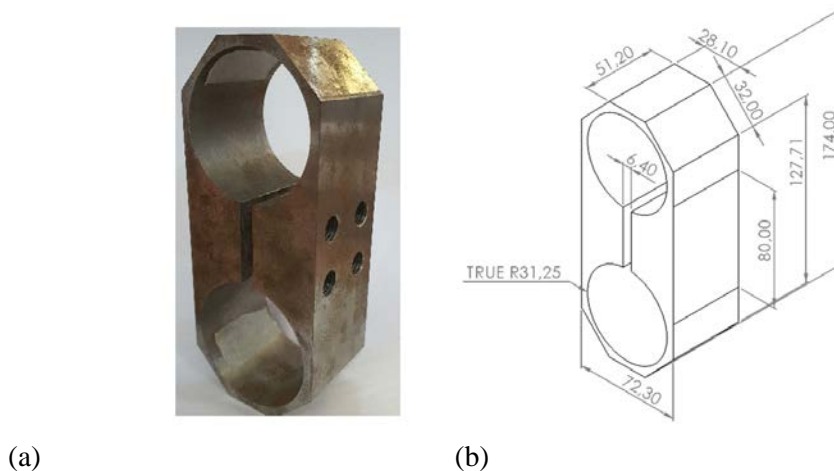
Picture of a) octagonal ring and b) dimensions (mm)
